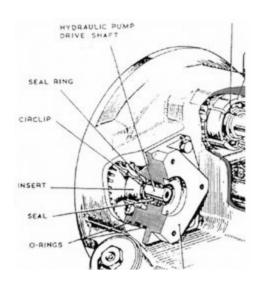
Mk 20 refuelling pod hydraulic pump mounting
